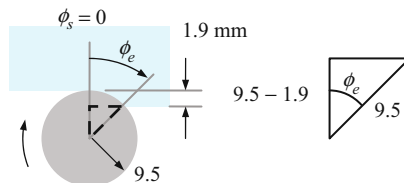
Exit angle for 10% radial immersion up milling cut
